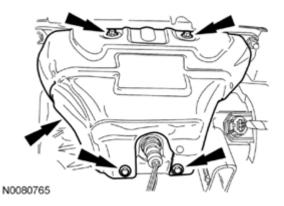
Locating Exhaust Manifold Heat Shield Bolts And Heat Shield Courtesy of FORD MOTOR CO.
